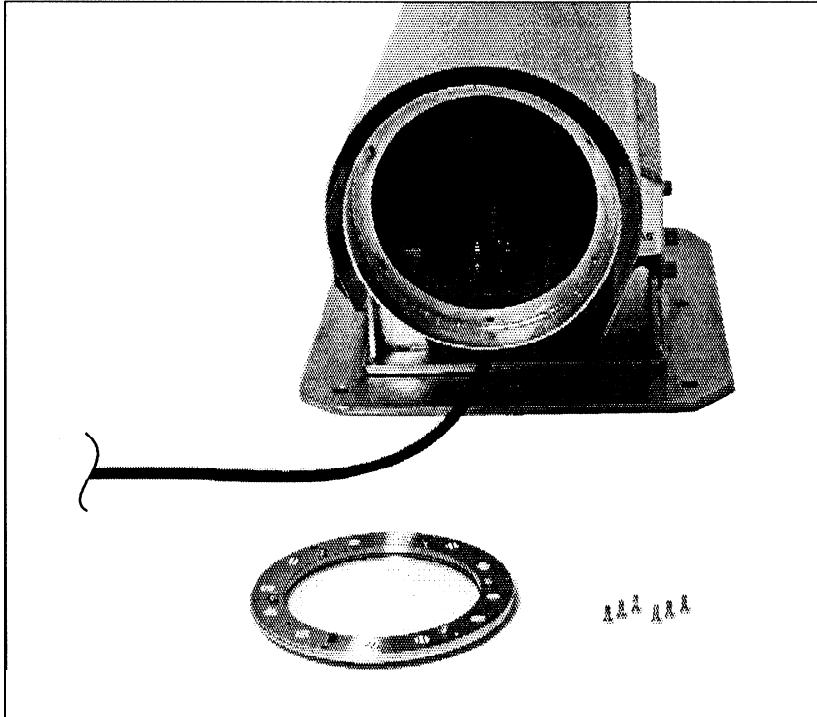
The window holder is mounted on the emitter and the receiver with the six outer, unmarked screws.
